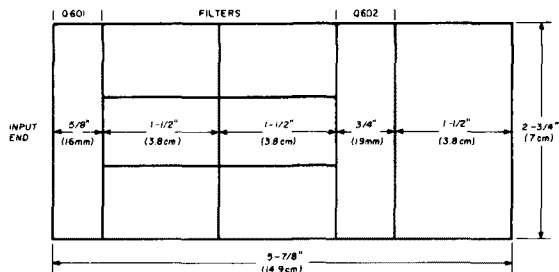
Layout of the information filter assembly. The filters are mounted from the opposite side; standoffs are used to mount this unit to the chassis. The size and shape of this unit may be modified to accommodate filters which are available to the builder. Unit is 1-inch (25mm) high; last compartment is nearly empty.
